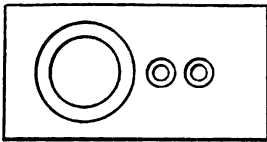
Cast Iron Body Die, used with Tool Steel Bushings
